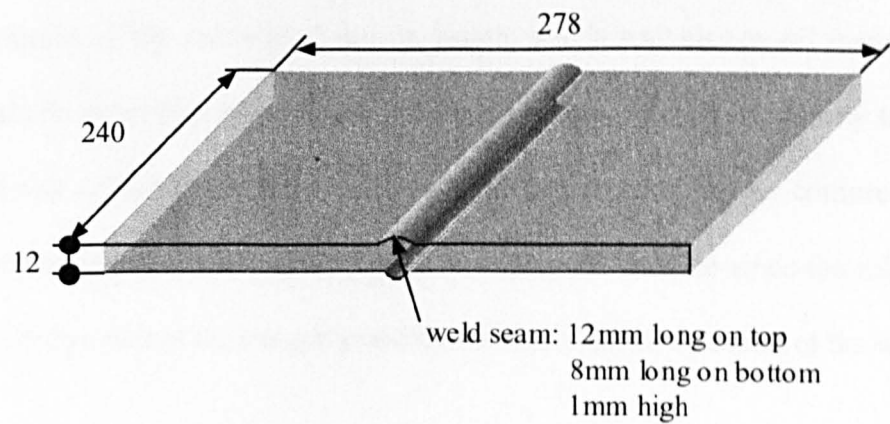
Schematic configuration of the VPPA 2024-T351 weld
